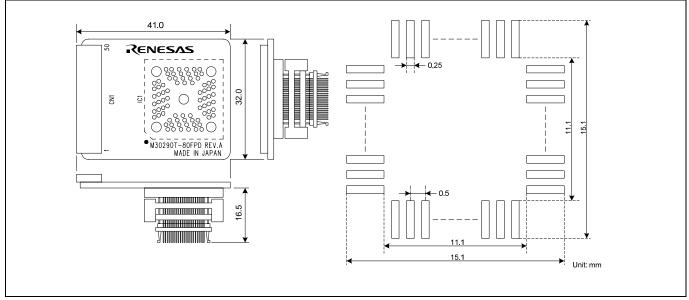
External dimensions and a sample foot pattern of the converter board M30290T-80FPD
